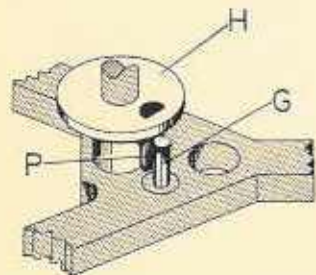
Detailed view of contact pin G and its contact-wiping guard jewel P, held in roller plate H.
